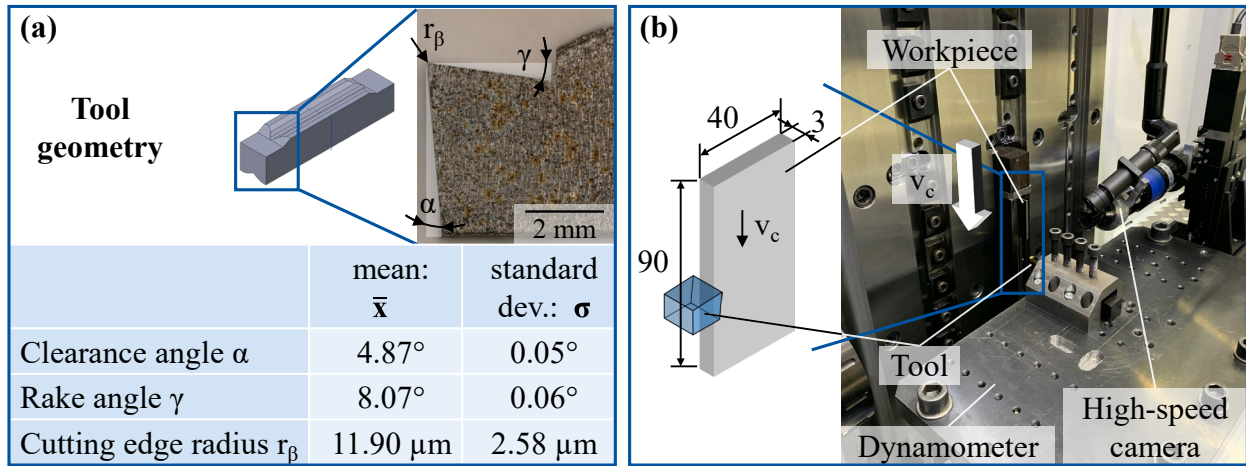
Measured tool geometry over all investigated cutting edges (a) and experimental setup (b).
